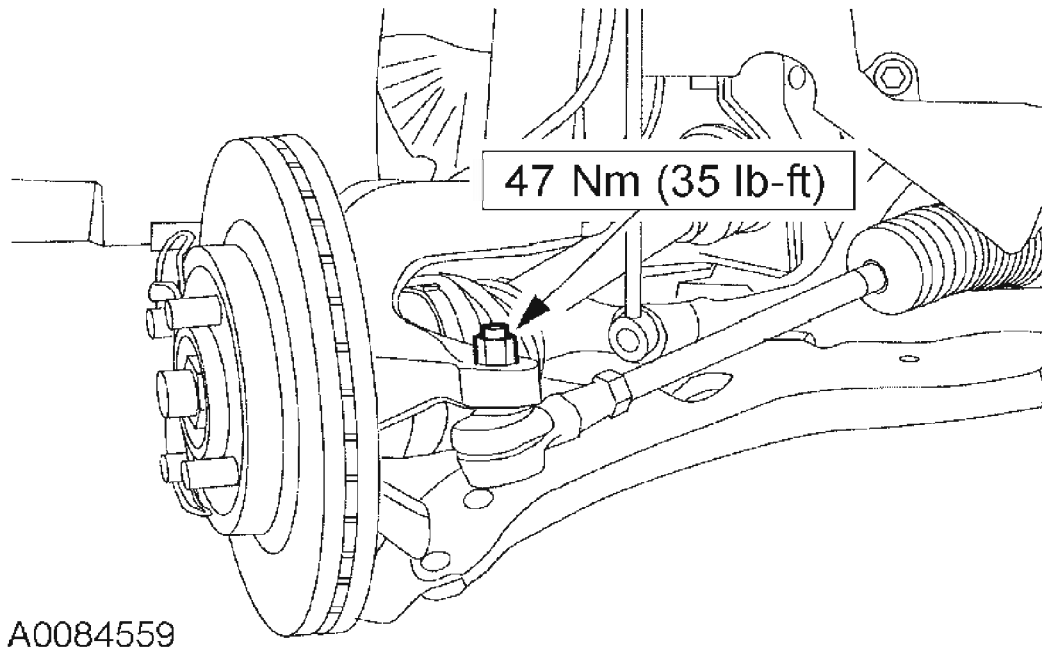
Attaching Tie-Rod End To Wheel Knuckle
